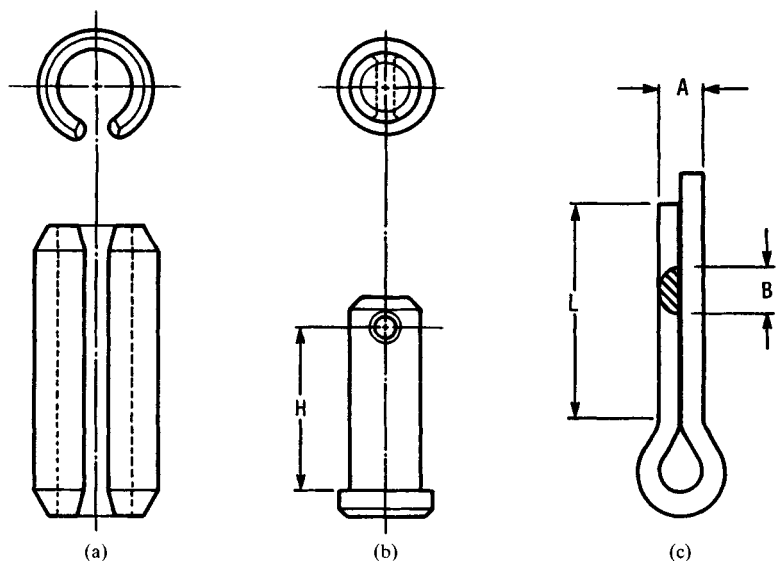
(a) Slotted spring pin; (b) clevis pin; (c) cotter pin.
